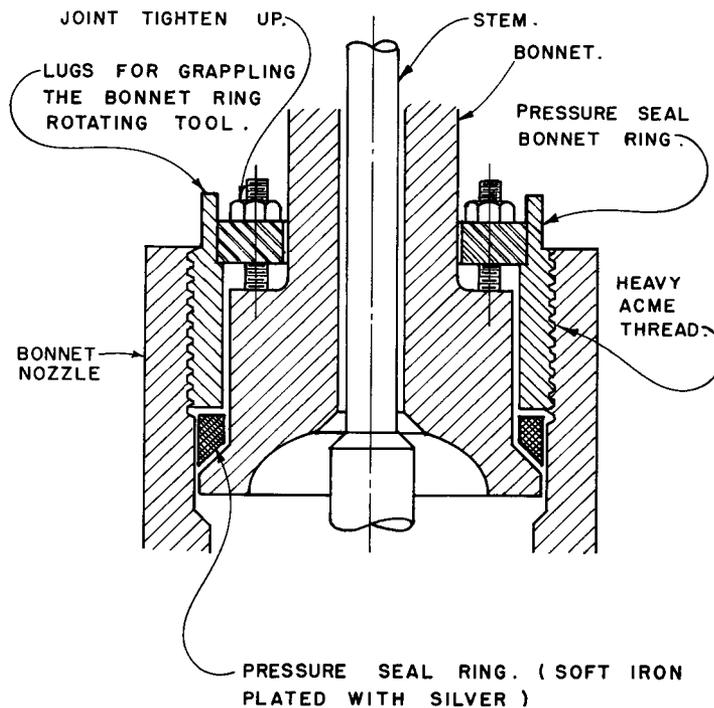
Pressure-Seal Bonnet-to-Body Joint.
